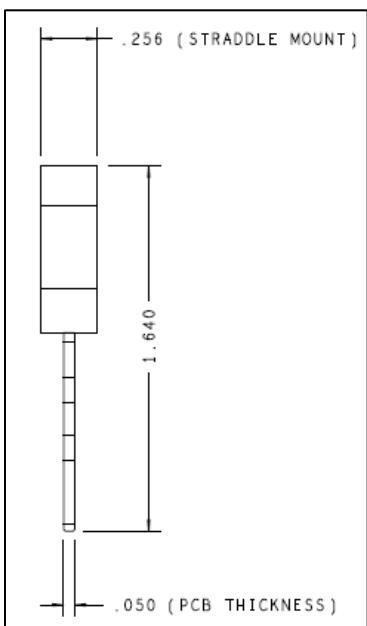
DDR5-A-UDM-288 - Dimensions Side
